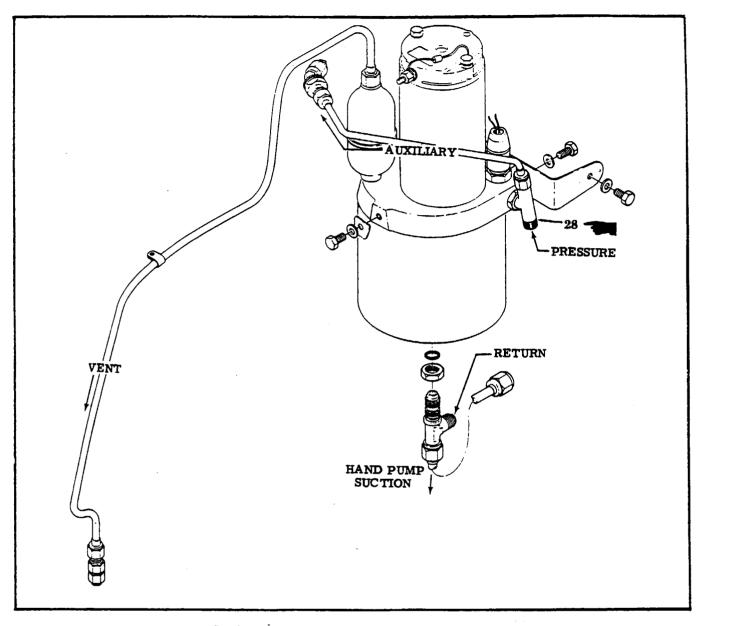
A-3. Hydraulic Power Pack Assembly (Sheet 2 of 2)
